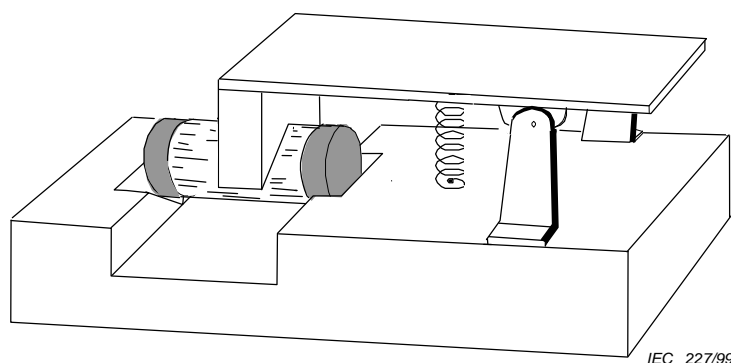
Insulation resistance and voltage proof test jig for rectangular surface mount resistors
